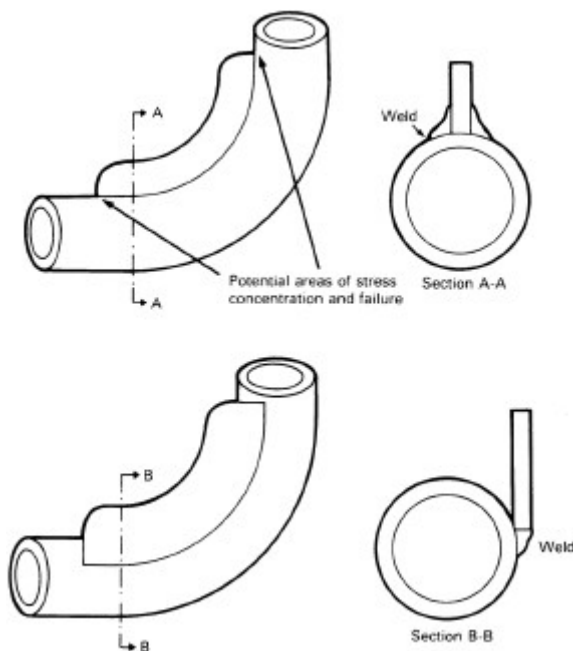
Wrong (top) and better (lower) ways to weld a gusset on to a bent tube.
